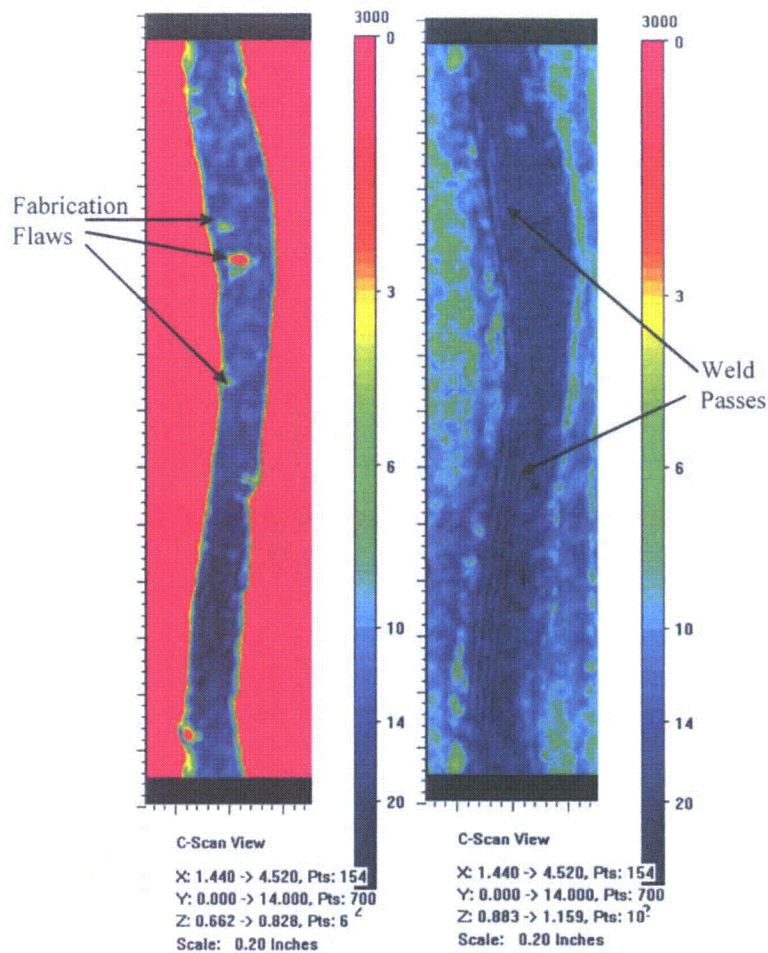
Ultrasonic Testing Responses for 2.25-MHz in Midland Control Rod Drive Mechanism. The first image shows the fusion zone of the weld where fabrication flaws were detected. The second image shows the J-groove weld area where the individual weld passes were detected.
